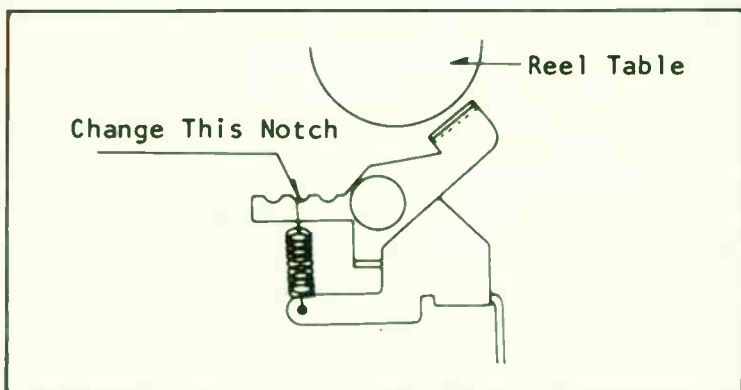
Spring tension torque adjustment (courtesy of Magnavox).
